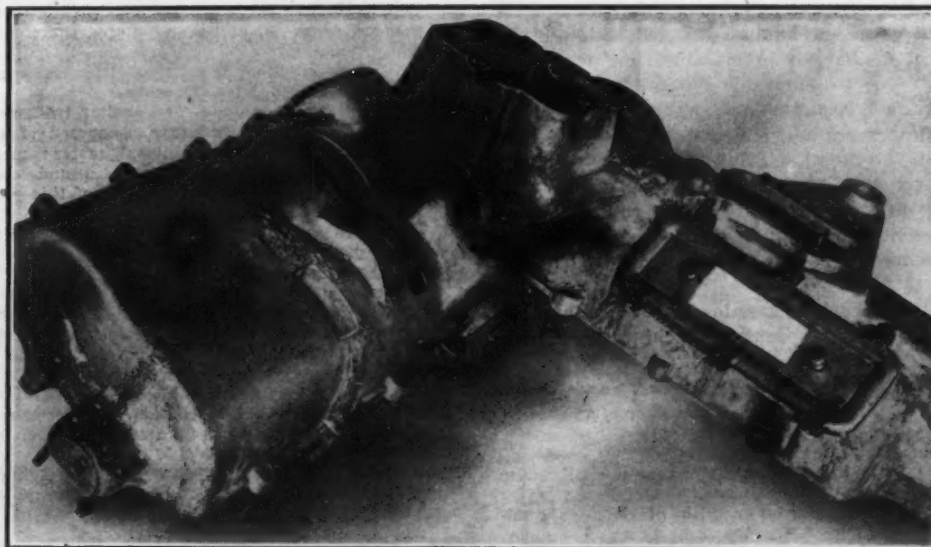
Upper and Lower Parts of a Transmission Case Which Was Welded in Fourteen Places.
